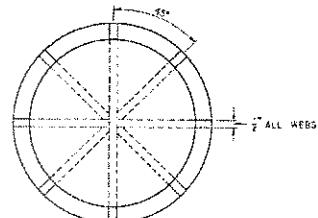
Rigid Bearing Plate for 12 in. Diameter Test
